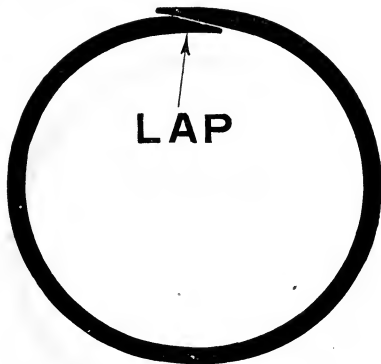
,946.—Lap weld process. The skelp used in making lap welded tubes is rolled to the necessary width and gauge for the size tubes to be made, the edges being scarfed and overlapped when the skelp is bent into shape, thus giving a comparatively large welding surface, compared with the thickness of the plate. The skelp is first heated to redness in a "bending furnace," and then drawn from the front of the furnace through a die, the inside of which gradually assumes a circular shape, so that the skelp when drawn through is bent into the form of a tube with the edges overlapping as shown. The skelp so formed is heated evenly to the welding temperature in a regenerative furnace. When the proper temperature is obtained, the skelp is pushed through an opening in the front of this furnace into the welding rolls, passing between two rolls set one above the other, each having a semi-circular groove, so that the two together form a circular pass. Between these rolls a mandrel is held in position inside the tube, the lapped edges of the skelp being firmly pressed together at a welding heat between the mandrel and the rolls. The tube then enters a similarly shaped pass to correct any irregularities and to give the outside diameter required. It will be noted that the outside diameter is fixed by these rolls; any variation in gauge, therefore, makes a proportional variation in the internal diameter. This also applies to butt weld pipe. Finally, the tube is passed to the straightening, or cross rolls, consisting of two rolls set with their axes askew. The surfaces of these rolls are so curved that the tube is in contact with each for nearly the whole length of the roll, and is passed forward and rapidly rotated when the rolls are revolved. The tube is made practically straight by the cross rolls, and is also given a clean finish with a thin, firmly adhering scale. After this last operation, the tube is rolled up an inclined cooling table, so that the metal will cool off slowly and uniformly without internal strain. When cool enough, the rough ends are removed by cold saws or in a cutting off machine, after which the tube is ready for inspection and testing. In the case of some sizes of double extra strong pipe (3 inch to 8 inch), made by the lap weld process, the pipes are first made to such sizes as will telescope one within the other, the respective welds being placed opposite each other; these are then returned to the furnace, brought to the proper heat, and given a pass through the welding rolls. While a pipe made in this way is, in respect to its resistance to internal pressure, as strong or stronger than when made from one piece of skelp, it is not necessarily welded at all points between the two tubular surfaces; however, each piece is first thoroughly welded at the seam before telescoping.
